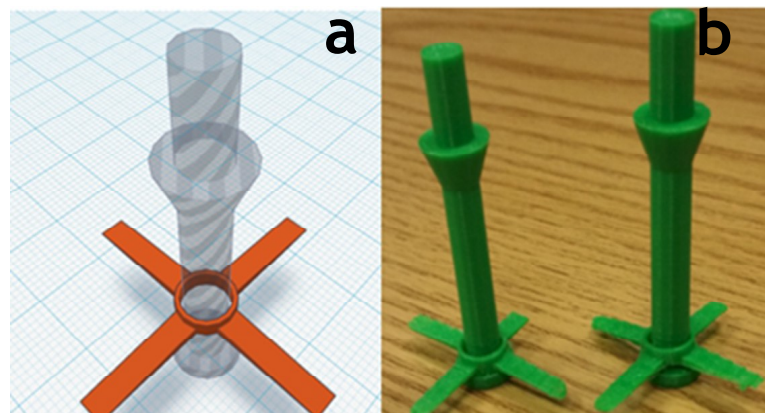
Manual fan (a) CAD design and (b) prototype.
